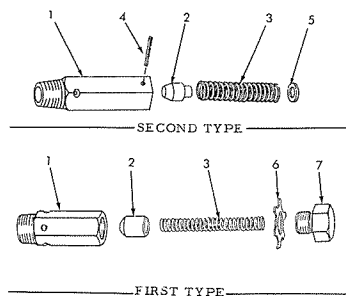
Oil Pressure Relief Valve Assembly (T-13181)
